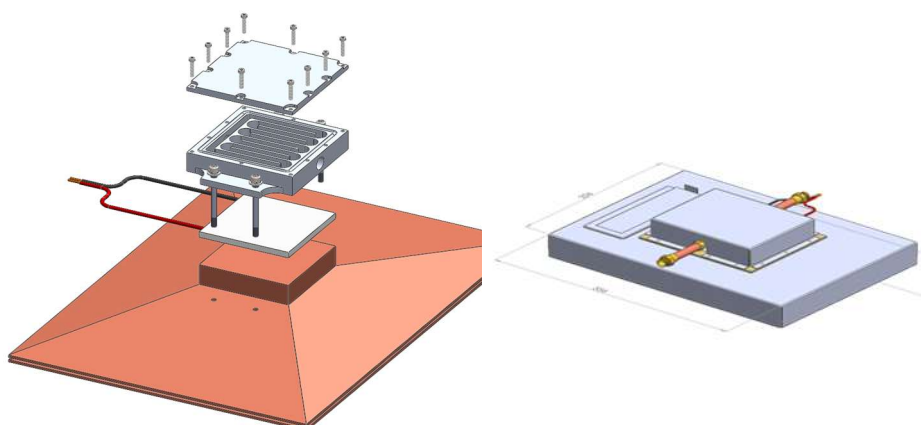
Heat flux concentrator (HFC), TE module and water cooler assembly
